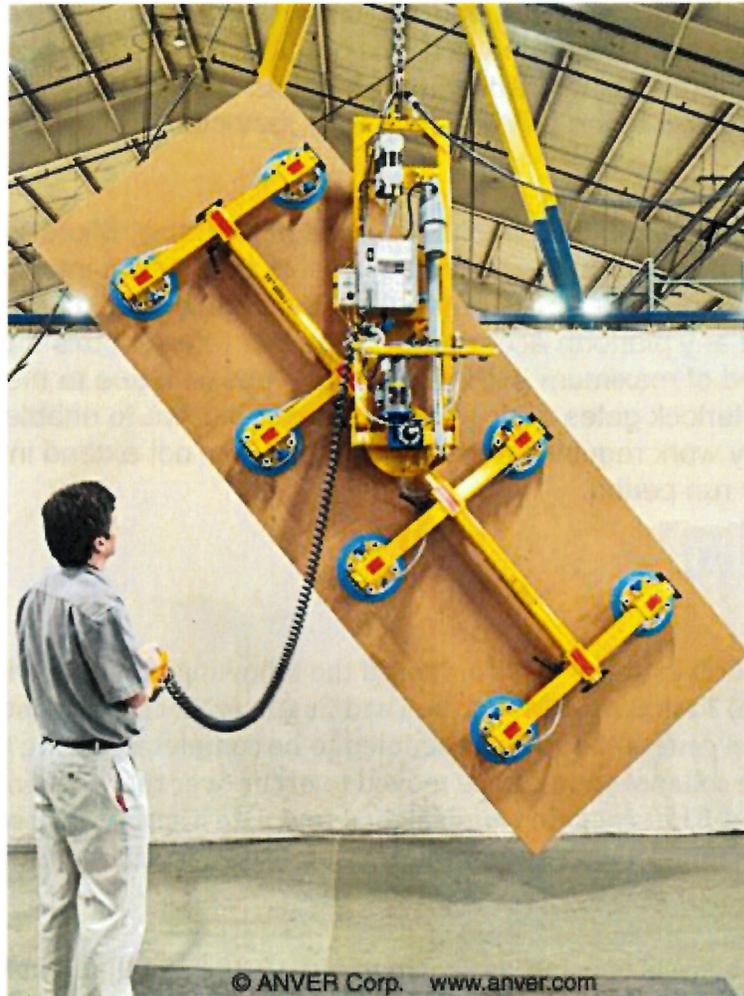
Lifting vacuum jig that will be used to move the panels.
